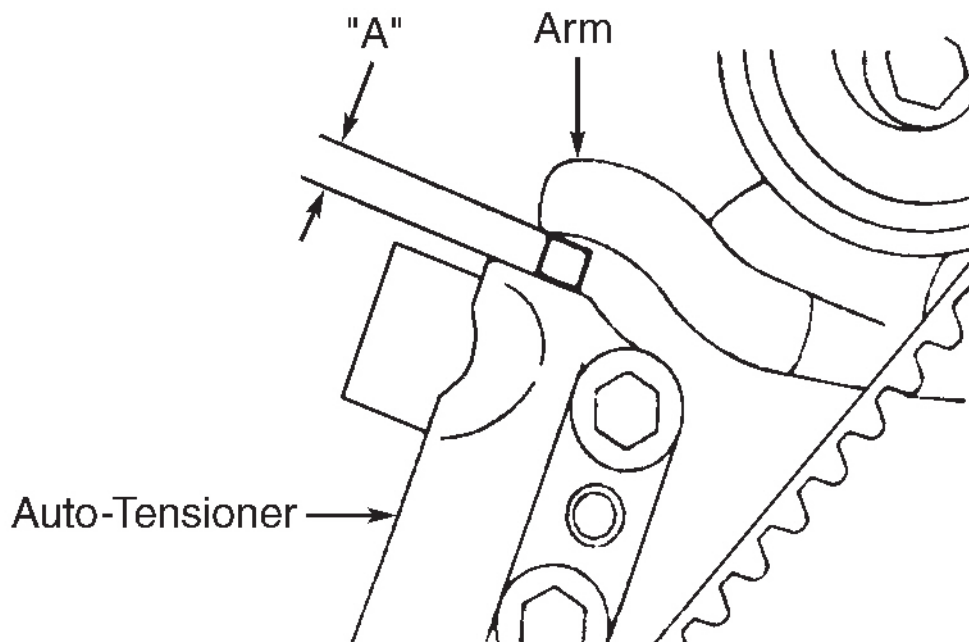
Installing Set Screw To Retract Auto Tensioner Rod (Showing Position Of Set Screw Installed)
